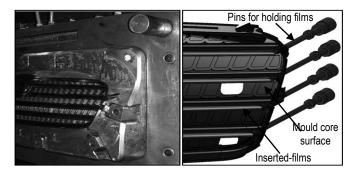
Retention pins mounted in the core mould that firmly holds the films in the cavity mould.
